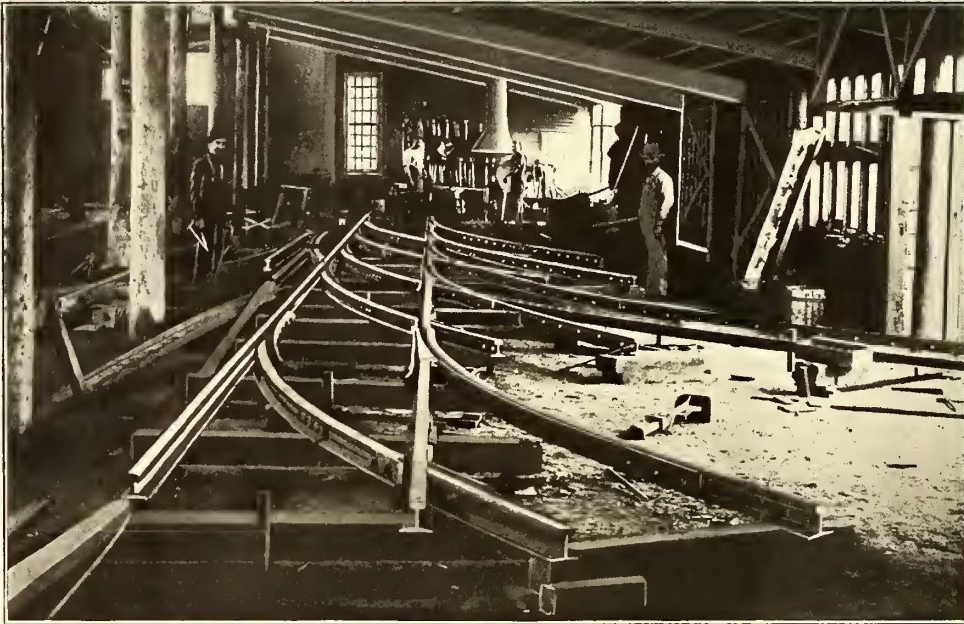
LAYING OUT SPECIAL WORK IN CONSTRUCTION SHOP
